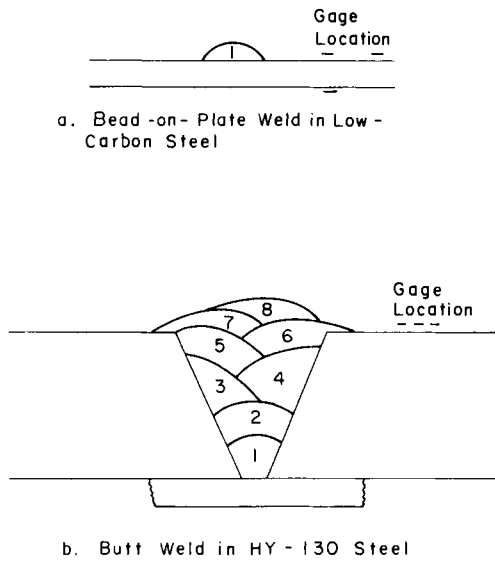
Weld cross-section and gage location for Test 4, HY-130 steel.
